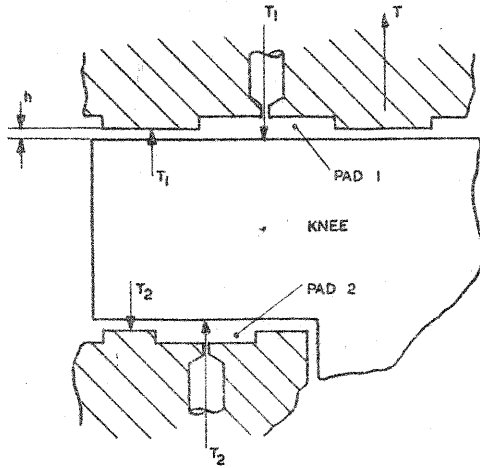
FIG. II. VERTICAL SECTION THROUGH TRANSVERSE SLIDE BEARING AND DETAILS OF PADS.
